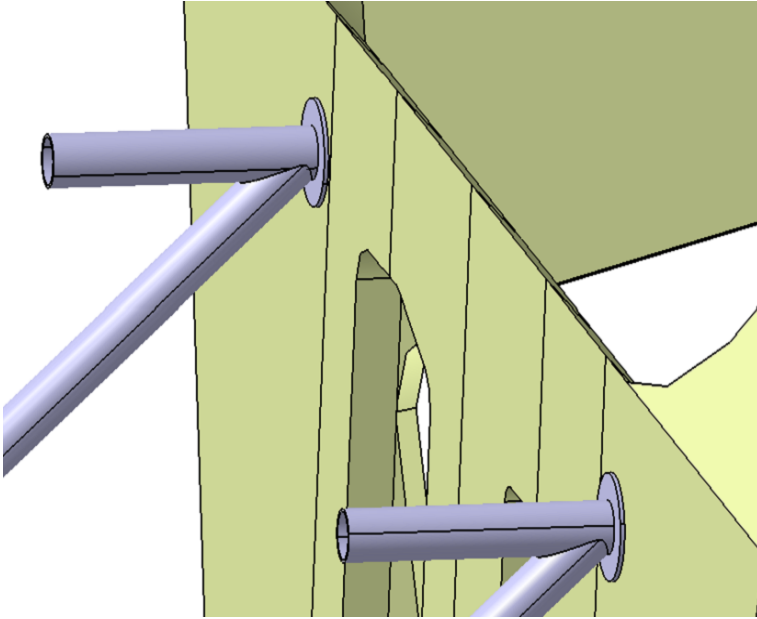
Linkage mounting points on the chassis. Plate is bolted to chassis. The horizontal tube welds to the plate. The diagonal tube is welded to the chassis and interfaces with the jack bar bolts via an M5 rod end.
